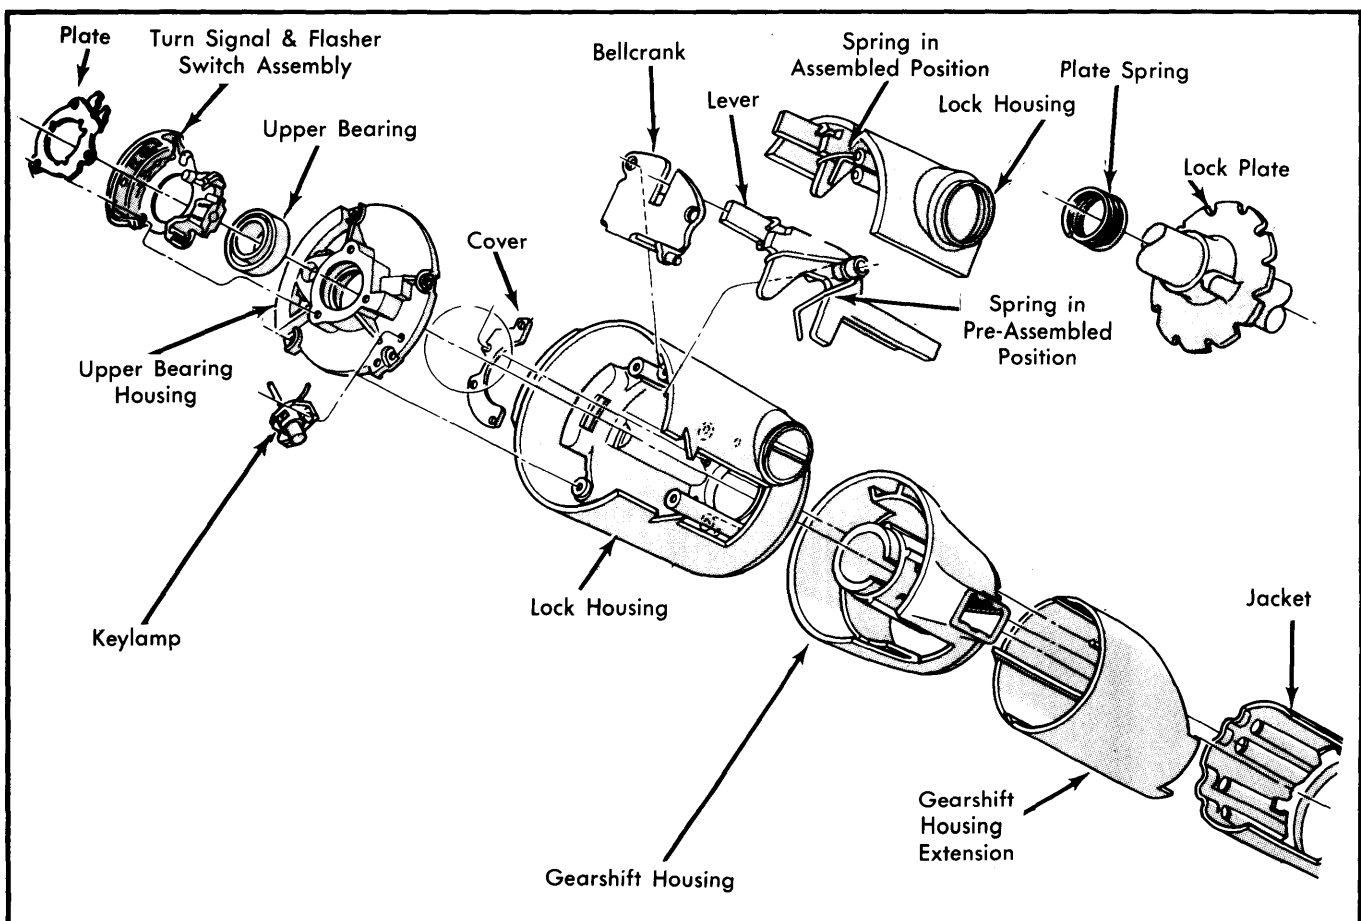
Chrysler Corp. (Exc. Horizon, Omni & Rampage) Steering Column Upper End
